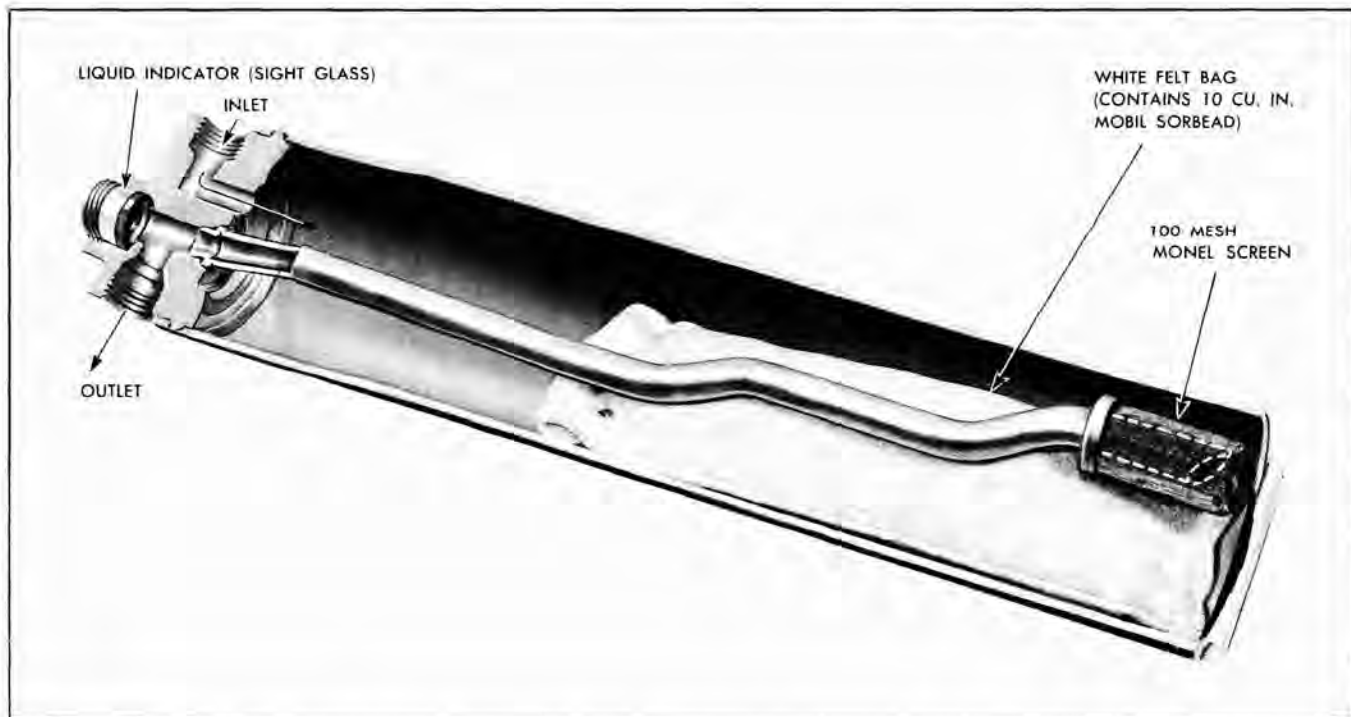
Cross Section of Pontiac Receiver and Liquid Indicator Assembly
